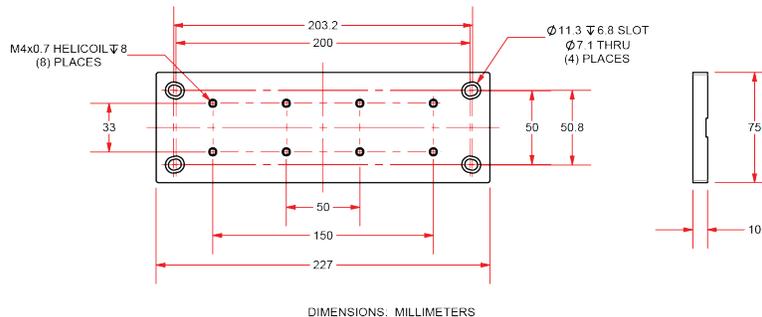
MPS75SL/SLE-025 Mounting Plate Dimensions
